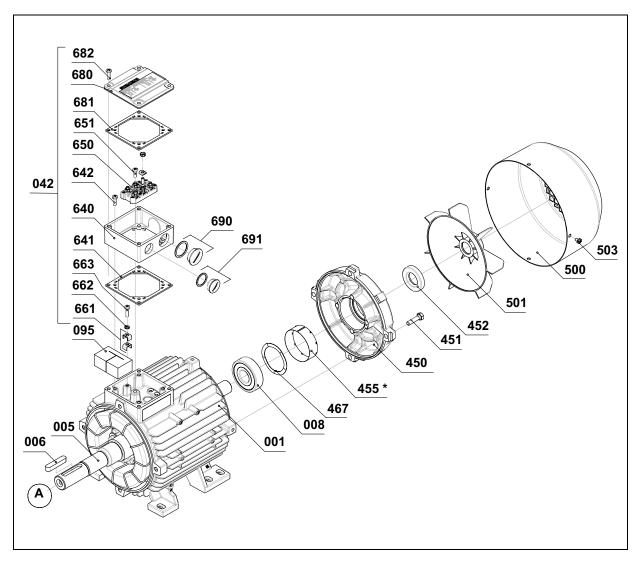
Exploded view: motor section (Example, delivered version may differ in some details)
